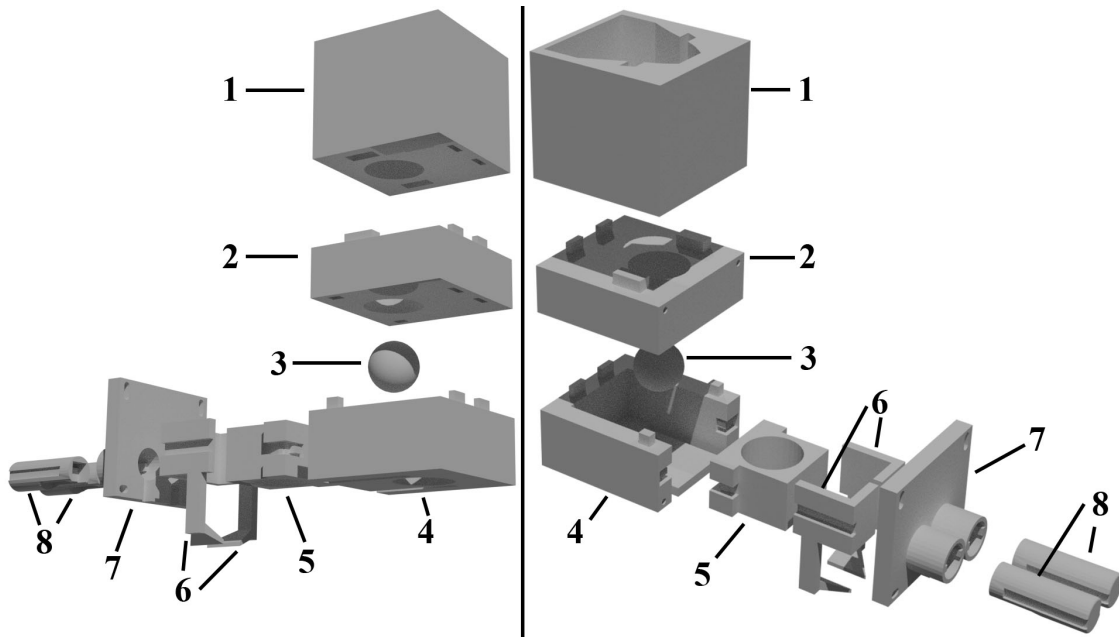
3D-design exploded view of the marble dispenser.
